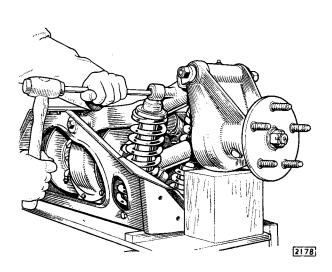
Drifting out the hydraulic damper mounting pin
